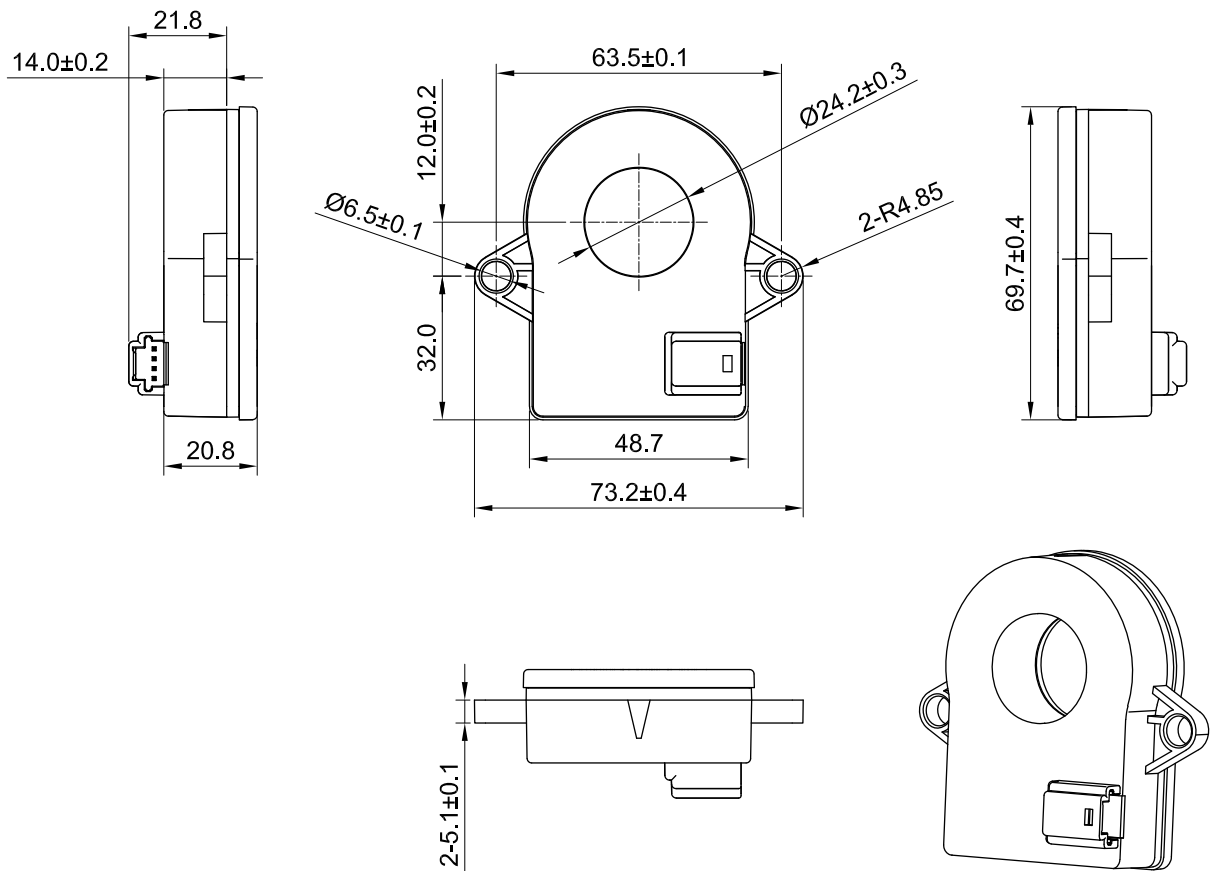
Dimension (unit: mm, tolerances for unmarked scales  $\pm 1$  mm)
